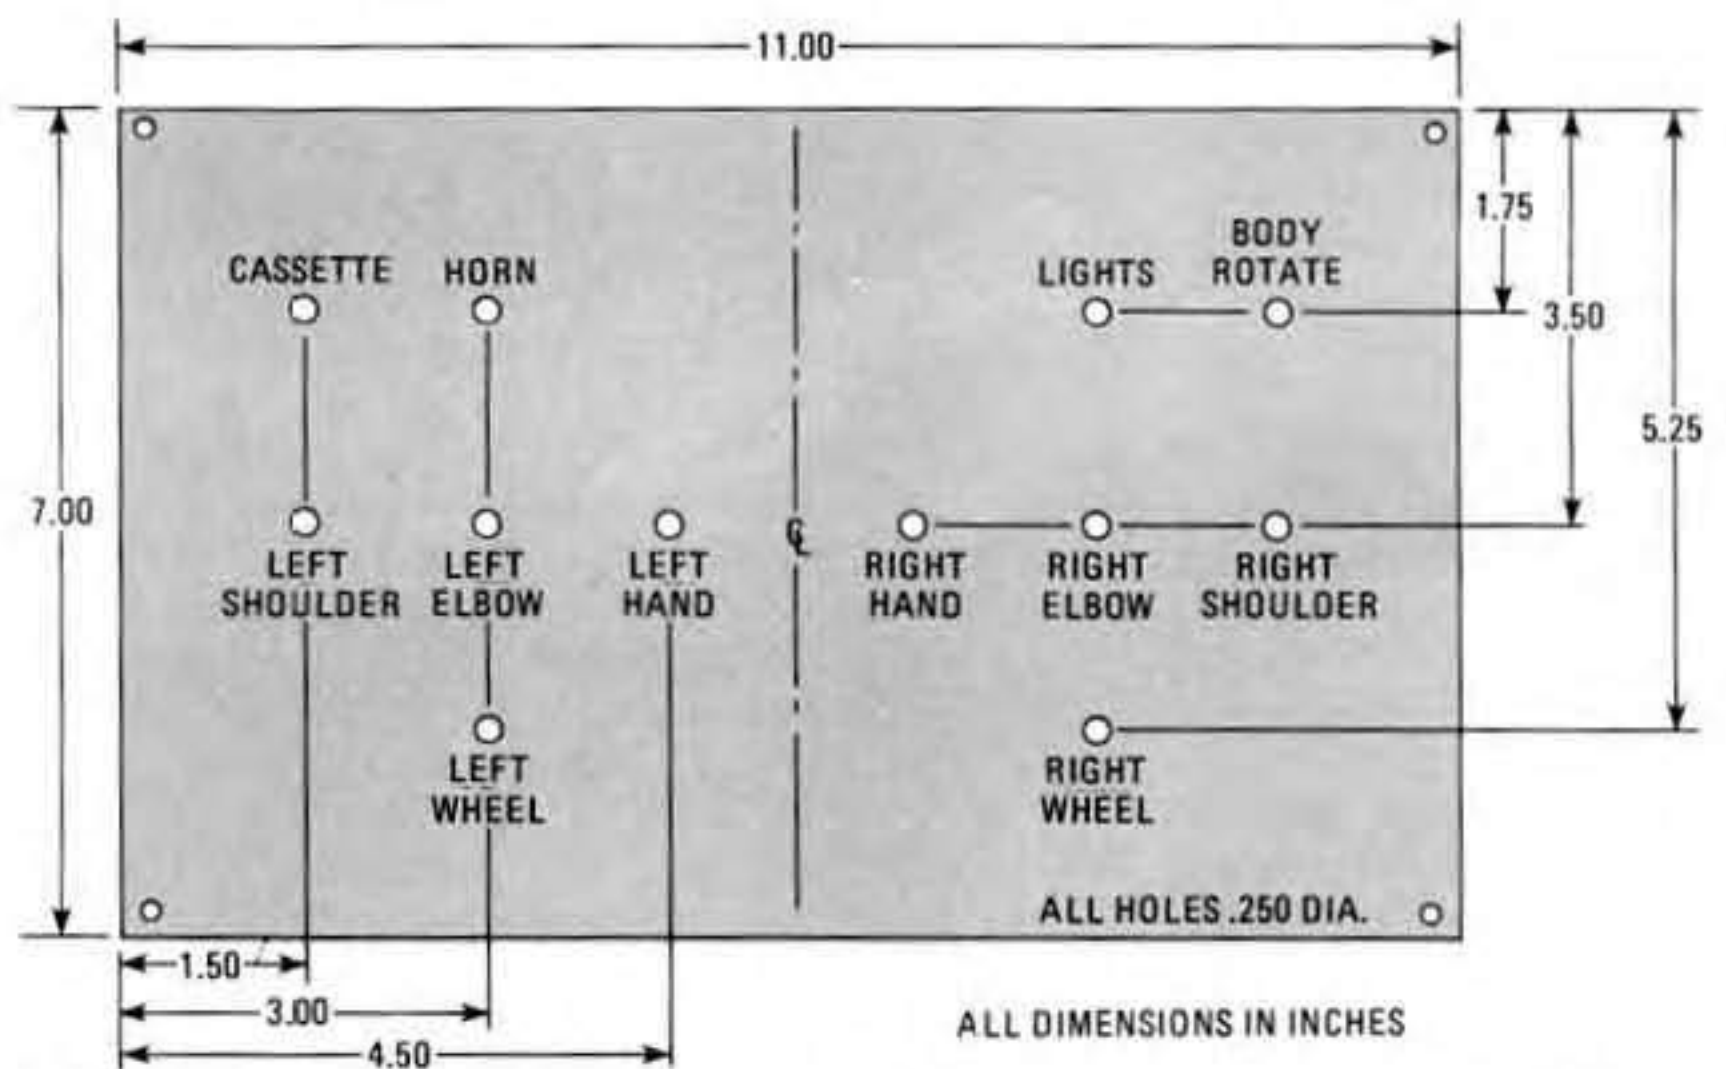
DRILLING TEMPLATE shows suggested switch placement. Dimensions and layout may be revised to meet specific requirements.
